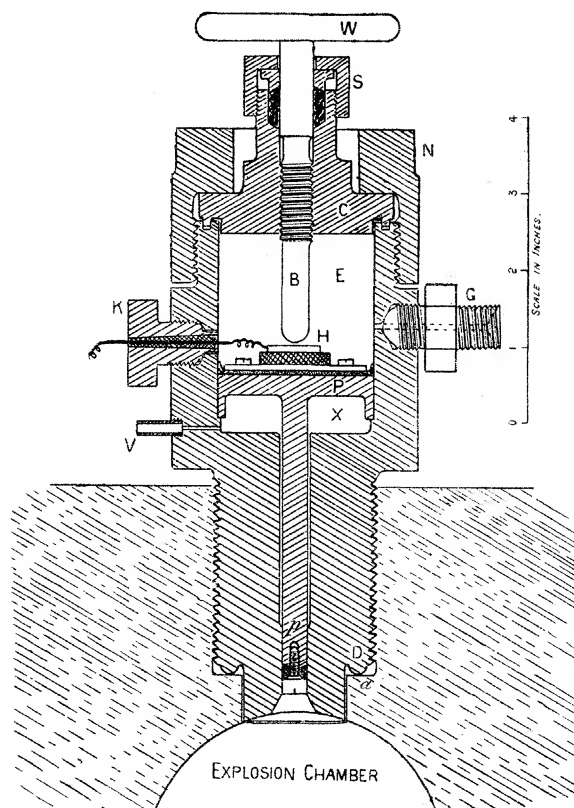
Explosion gauge. (Maximum pressure indicator.)
